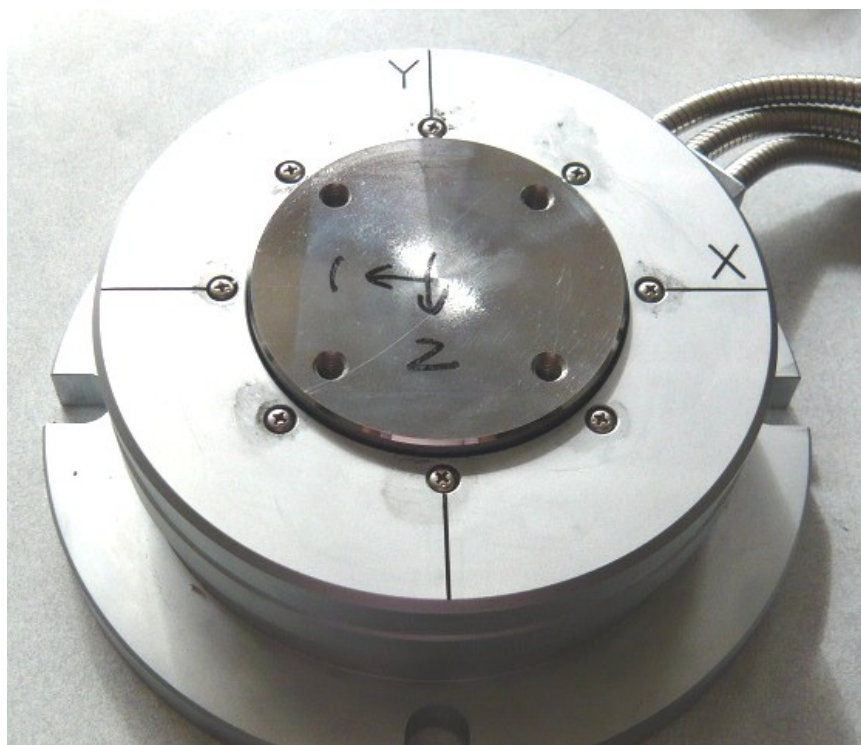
AST-ZM type tool strain gauge dynamometer
